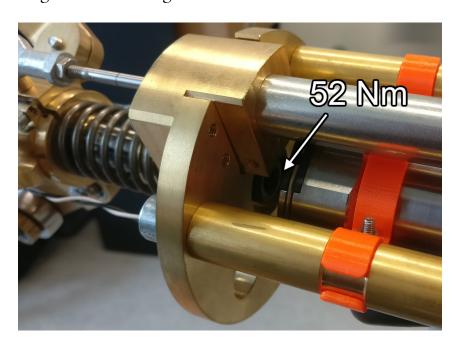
DL20 Assembly - Caliper Center Rod (52 Nm).
